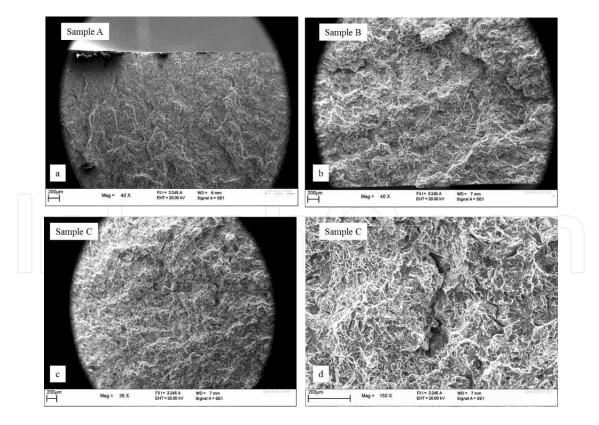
Fracture surface analysis: scanning electron microscopy images showing the nature of the fracture and some details on the fractured samples
